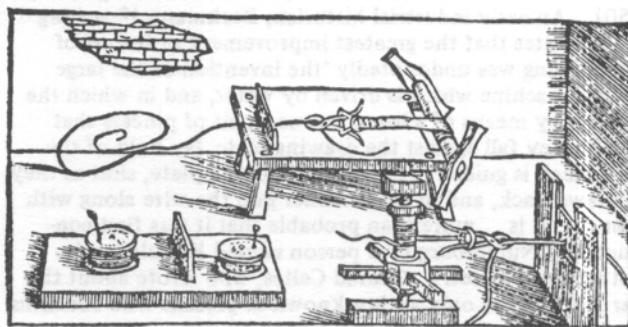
Three types of hand-operated wire-drawing machines, viz. the brake, the windlass, and the drum types, as shown by Biringuccio in 1540.
